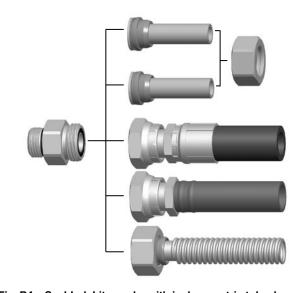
Seal-Lok Lite works with inch or metric tube, hose, and Flex Flange assemblies.
